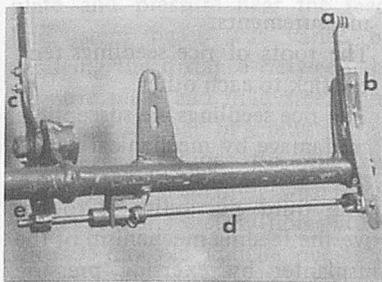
A Positive unloading mechanism (disengaged). (a) Planting fork, (b) Seeding ejector, (c) Cam, (d) Spring-loaded shaft, (e) Follower.
